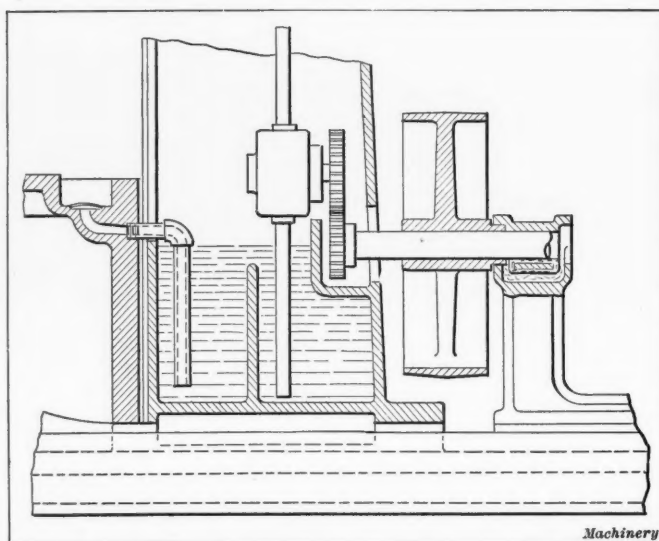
Section of Column showing Oil Tank and Enclosed Pump
